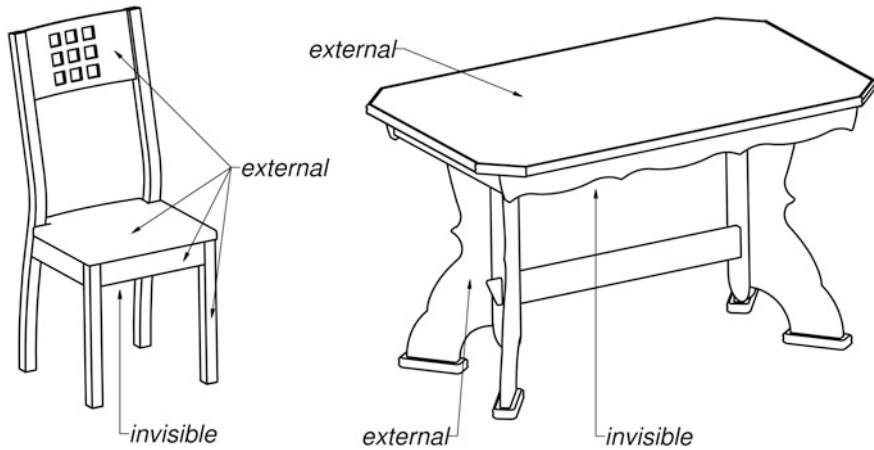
Types of surfaces in a skeletal furniture piece
